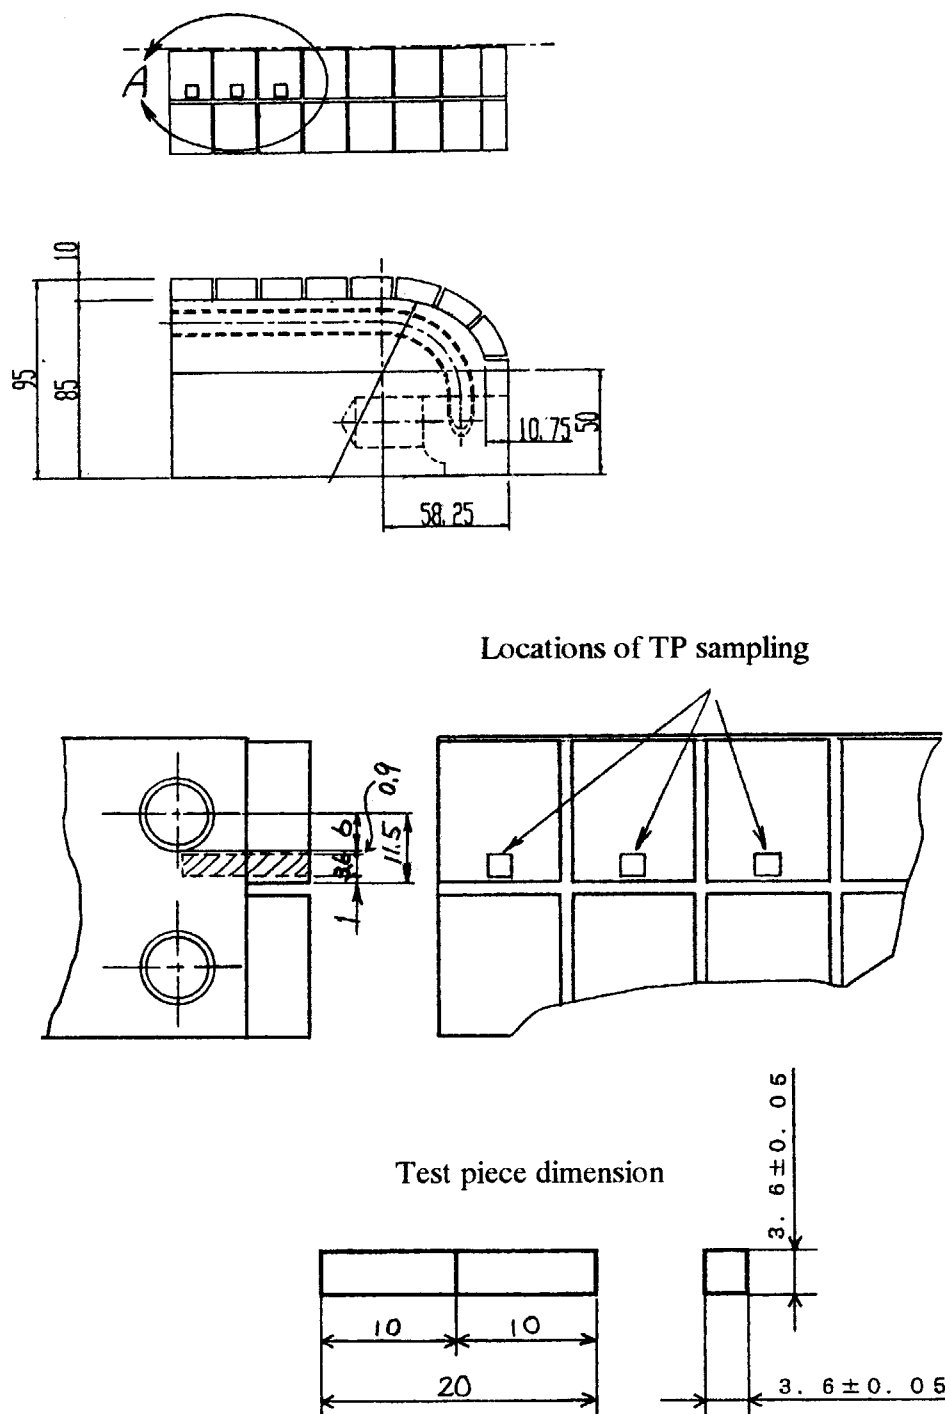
Locations of test pieces sampling and dimension of test piece.
